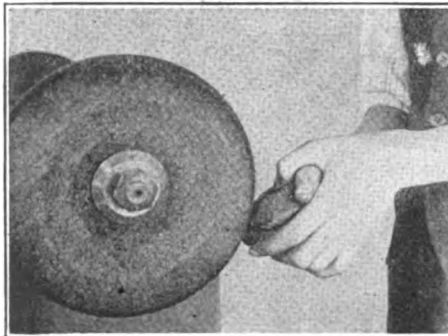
CROCUS POLISHING CAKE IS USED ON THE FELT BURNISHING WHEEL
